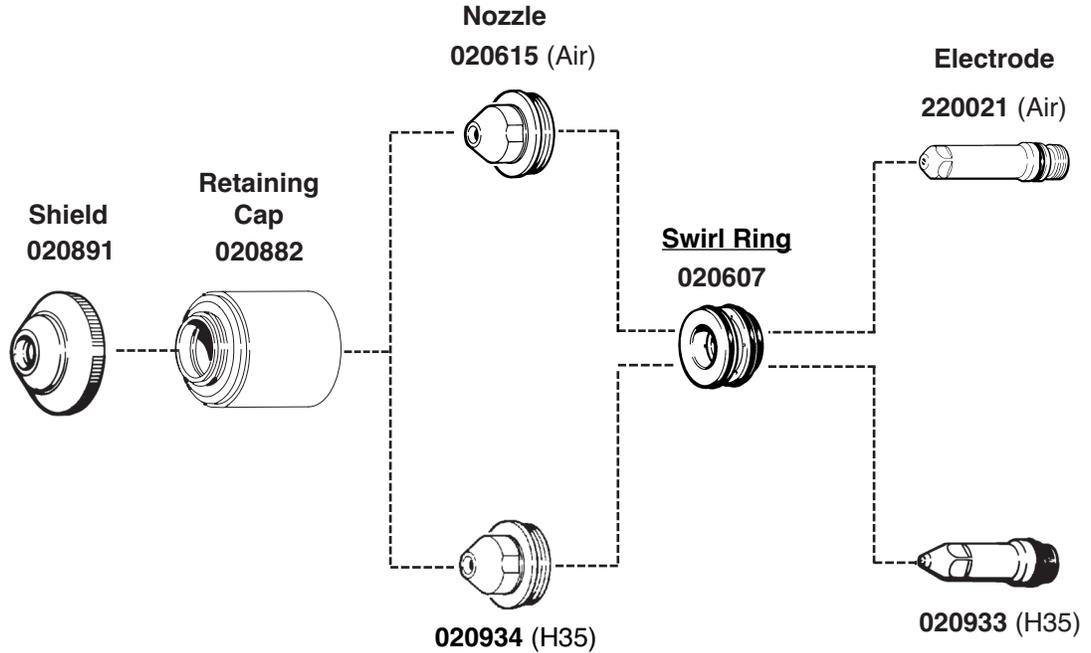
PAC200E (Gouging) Trigger Torch Consumable Parts
